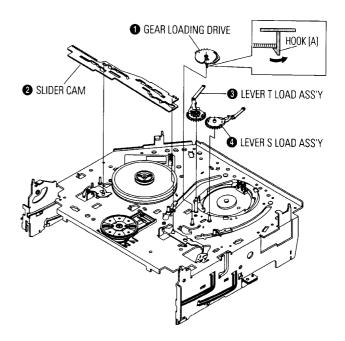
Gear Loading Drive, Slider Cam, Lever T, S Load Ass'y Removal
